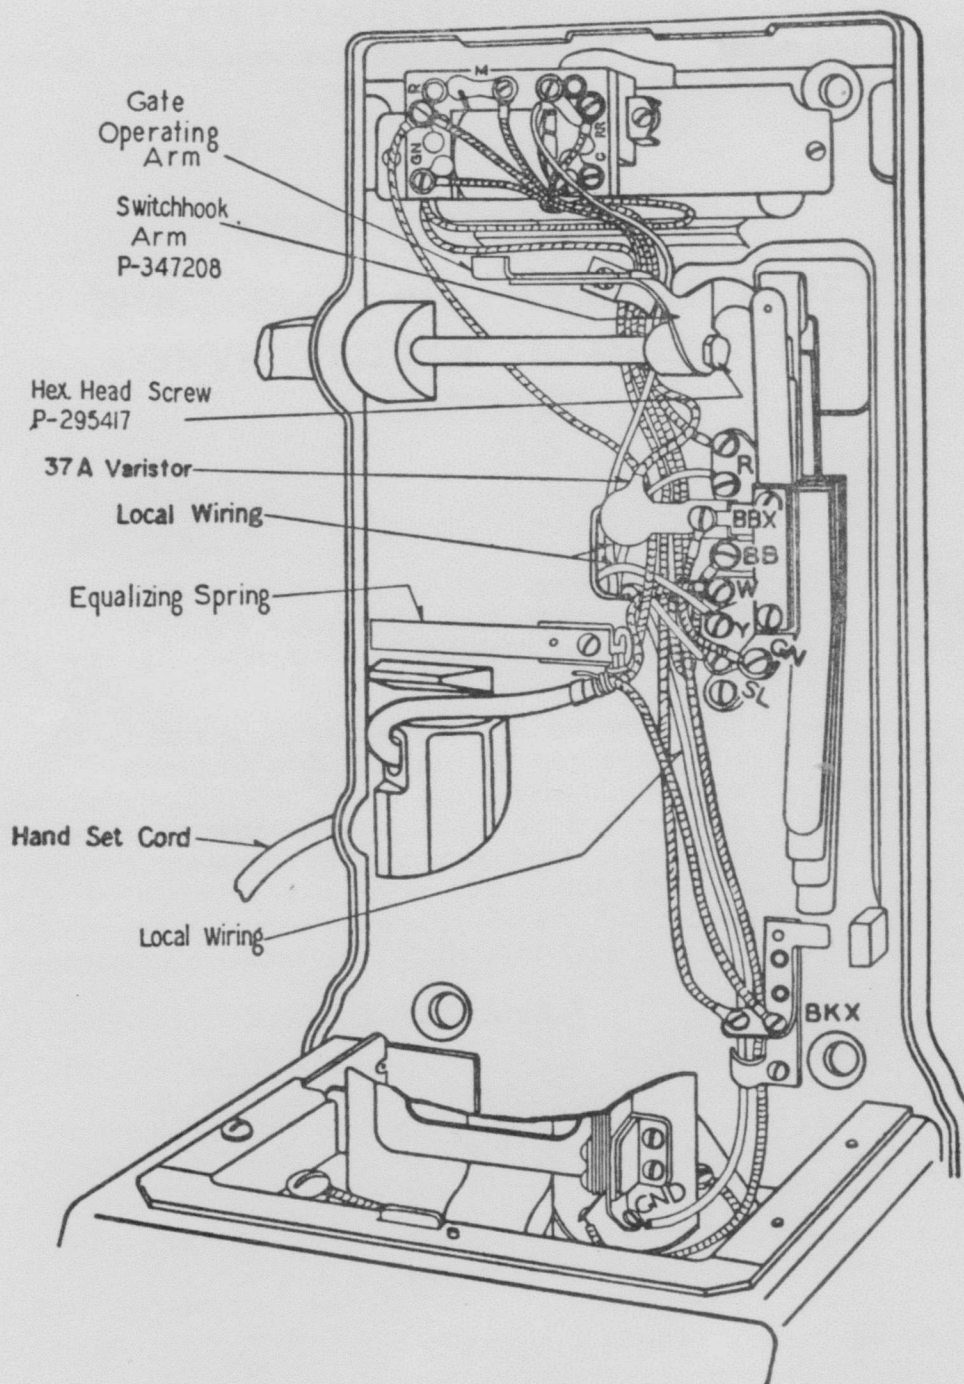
191-Type Coin Collector—Lower Housing and Backplate
